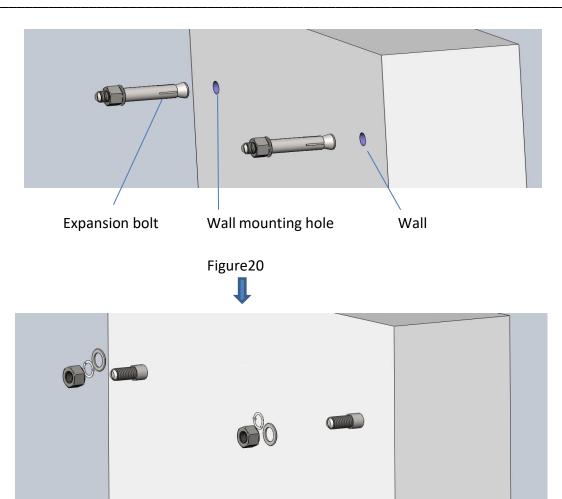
STEP5: Plug the pendant's mounting hole into the expansion bolt and then tighten the
